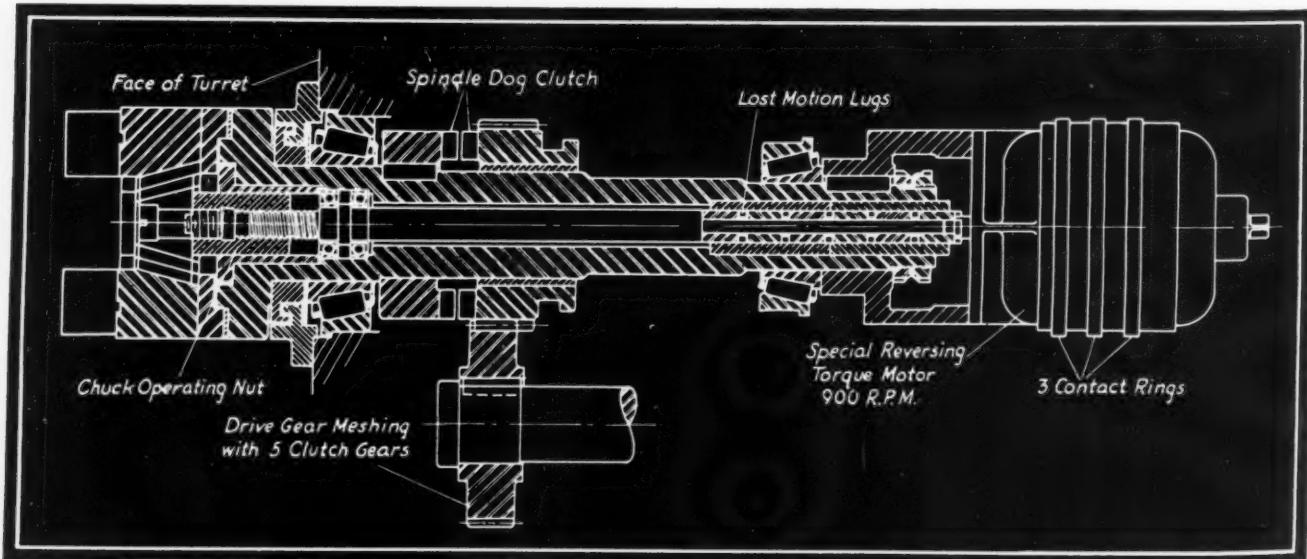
Cross section of single work spindle with chucking motor is shown here. Details of nut and screw which produce wedging action to operate chuck jaws are shown at the left of the drawing
